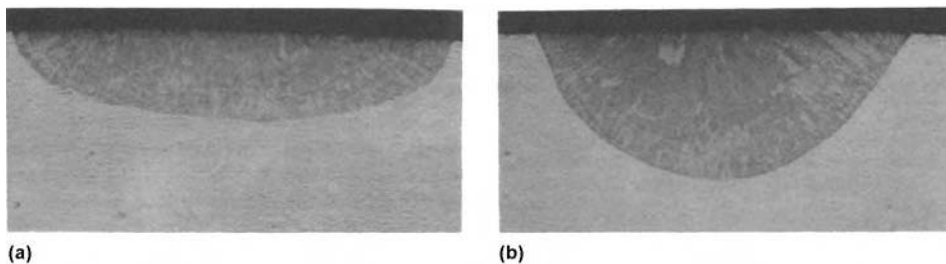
Partial-penetration gas tungsten arc welds made under the same welding conditions on two heats of type 304L stainless steel having the same nominal composition. (a) 3 ppm S, $d/w = 0.2$. (b) 160 ppm S, $d/w = 0.40$. Original magnification: $9\times$
